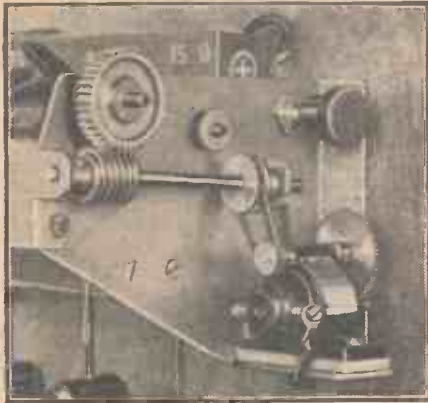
End view showing the gearing, motor and the speed control knob in the top right hand corner.
